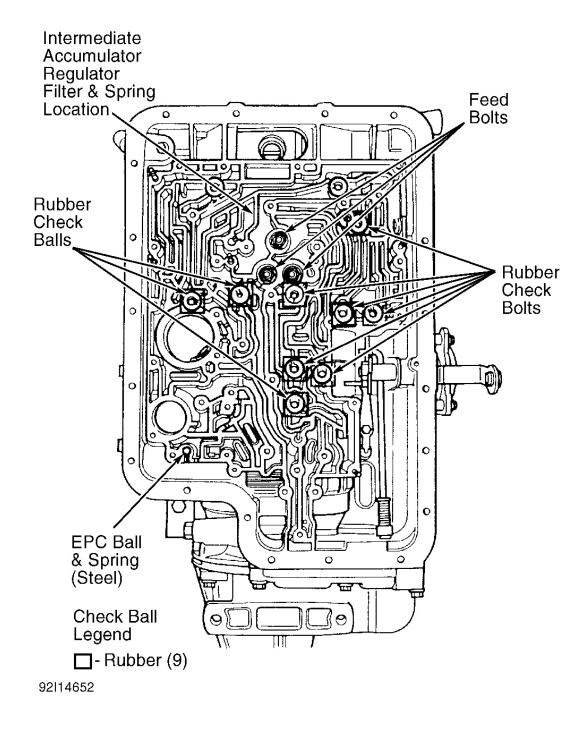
Locating Valve Body Check Balls Courtesy of FORD MOTOR CO.
